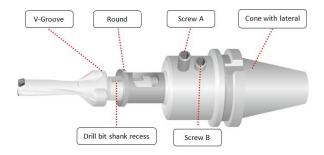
Assembly of TAF Drill on the BT40 Tool Holder of the HEIDENHAIN Controller in the CNC Machining Center.
